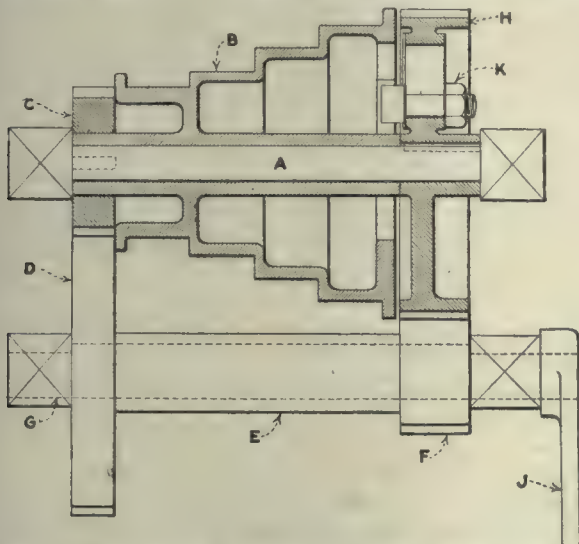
USUAL ARRANGEMENT OF BACK GEARS
